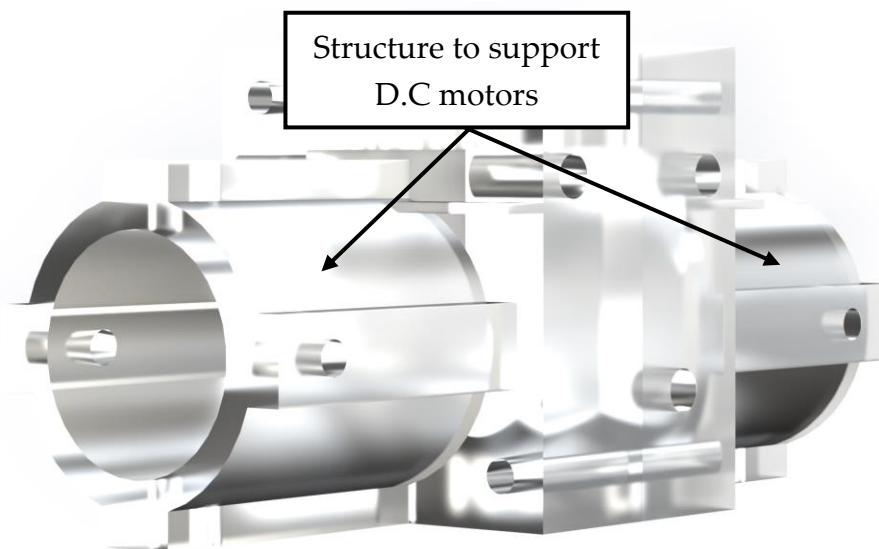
Rendered design of first prototype of reactor with supporting parts for D.C. stirring motors.
